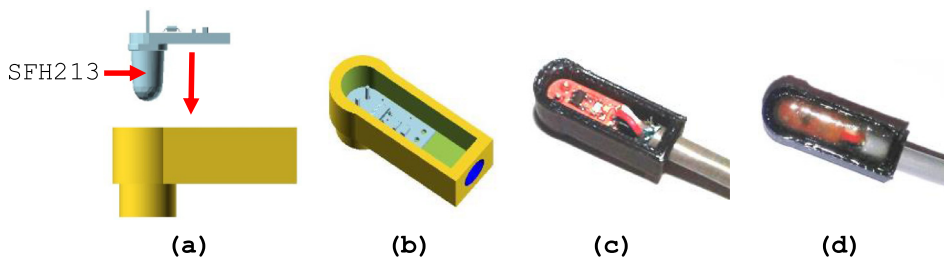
a) CAD model showing the photodiode amplifier PCB insertion into the module housing. b) A CAD model of the PCB located in the housing. c) The actual photodiode amplifier located in the 3D-printed module housing with cable attached. d) The module potted with epoxy resin.
